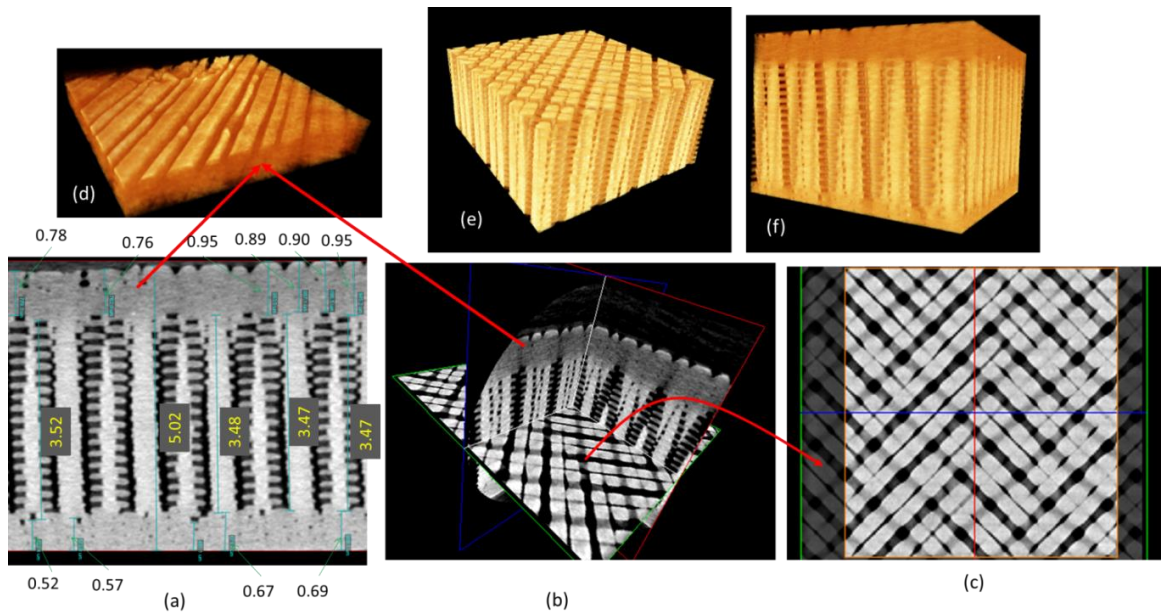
X-ray images of samples created with printer setting of 75% in-fill density. (a) Vertical plane slice view with dimensions in mm, (b) Slice view of three orthogonal planes, (c) Slice view of horizontal plane through the core, (d) 3D view of top shell, (e) Core and (f) Entire section.
